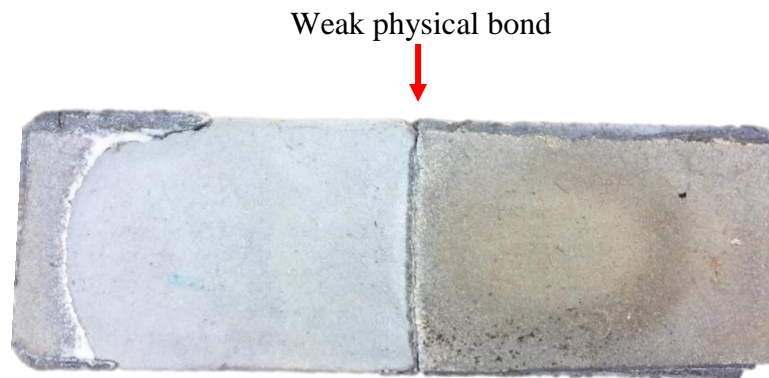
Bending test specimen of the sample 2 after casting before machining.
